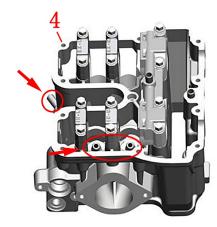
ASSEM	CYLINDER HEAD	After-sales parts description	CHK ADJ	Q
